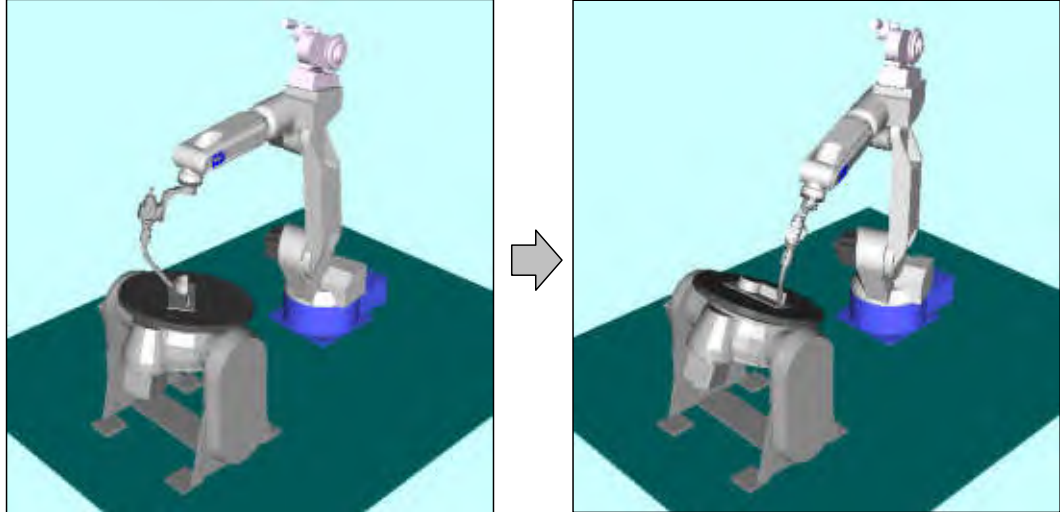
Arc welding using synchro motion control
